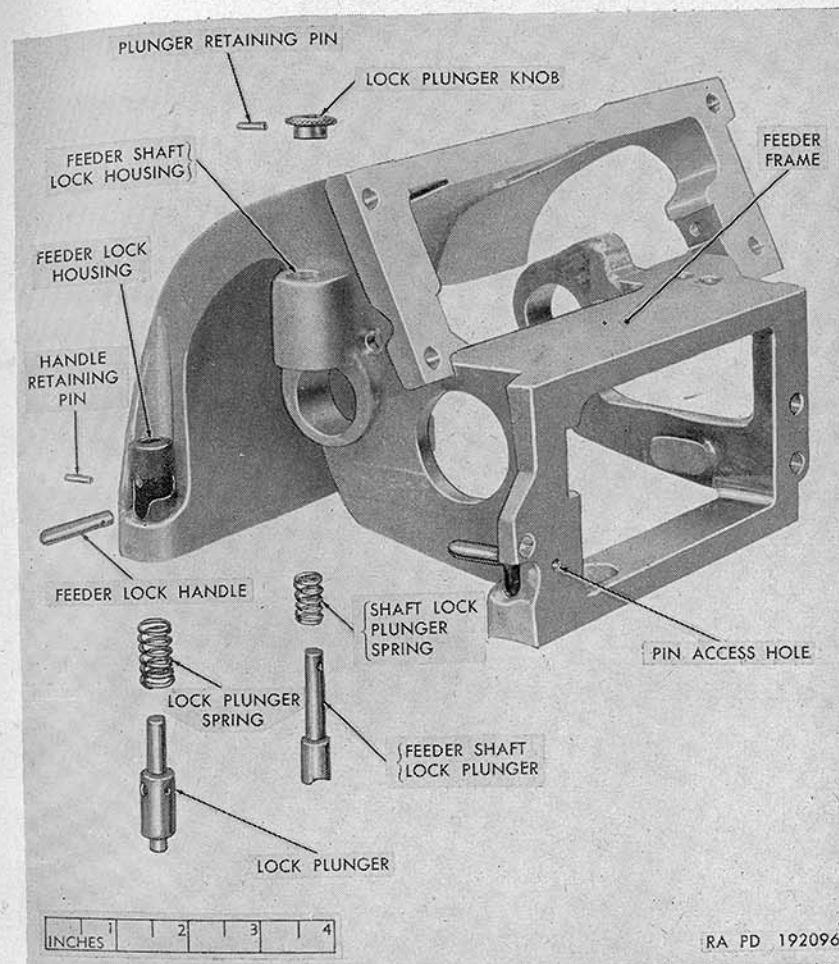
Feeder shaft lock parts and feeder lock parts—exploded from feeder frame.
